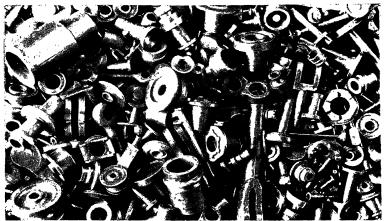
Samples of work done on a forging machine. (National Machinery Co.)
